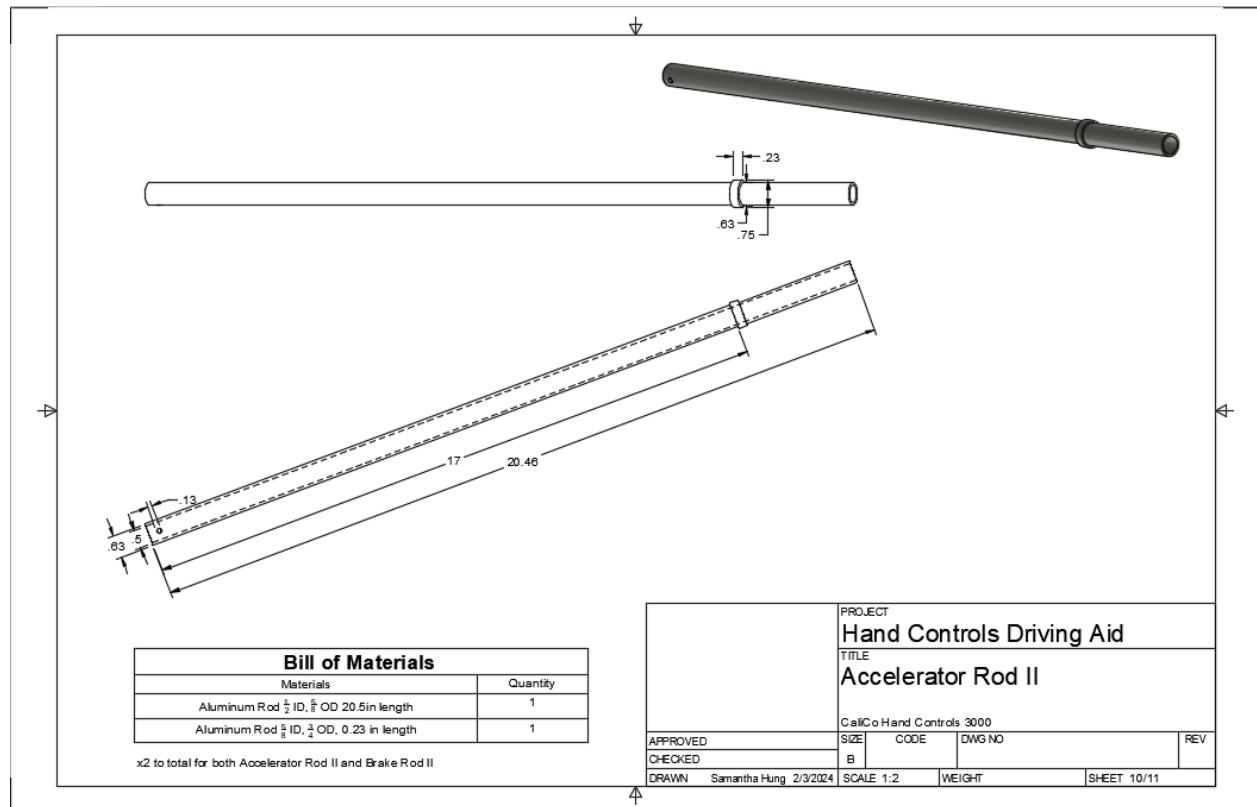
Detailed drawing and isometric view of the accelerator rod component
